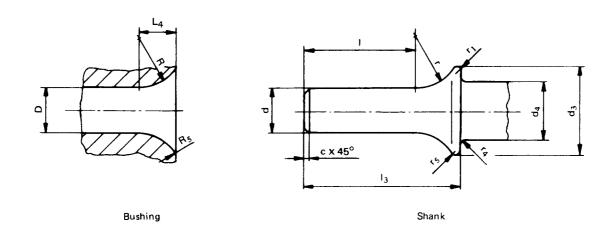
Light rivet snap shanks and chuck-bushings, tapered
